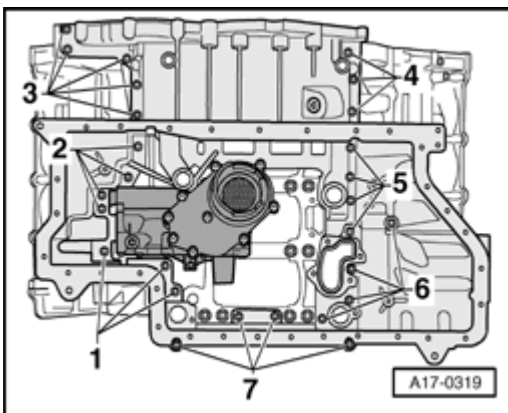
Removing/Installing Bolts For Upper Section Of Oil Pan
